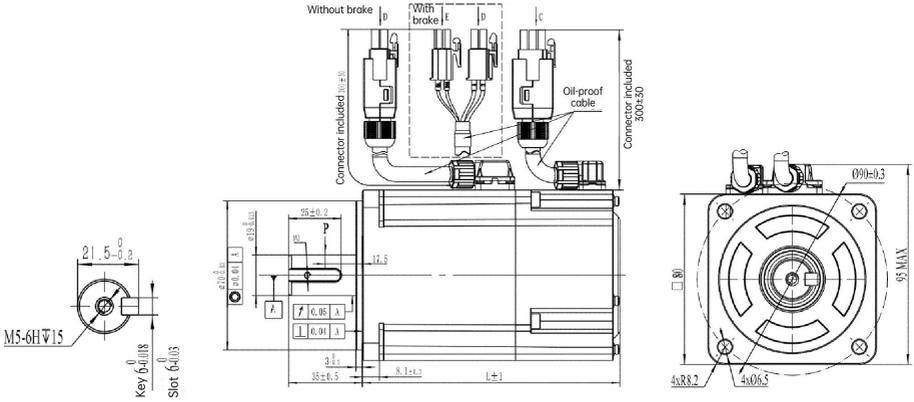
Outline and dimensions of frame No. 80 medium-inertia servo motor
